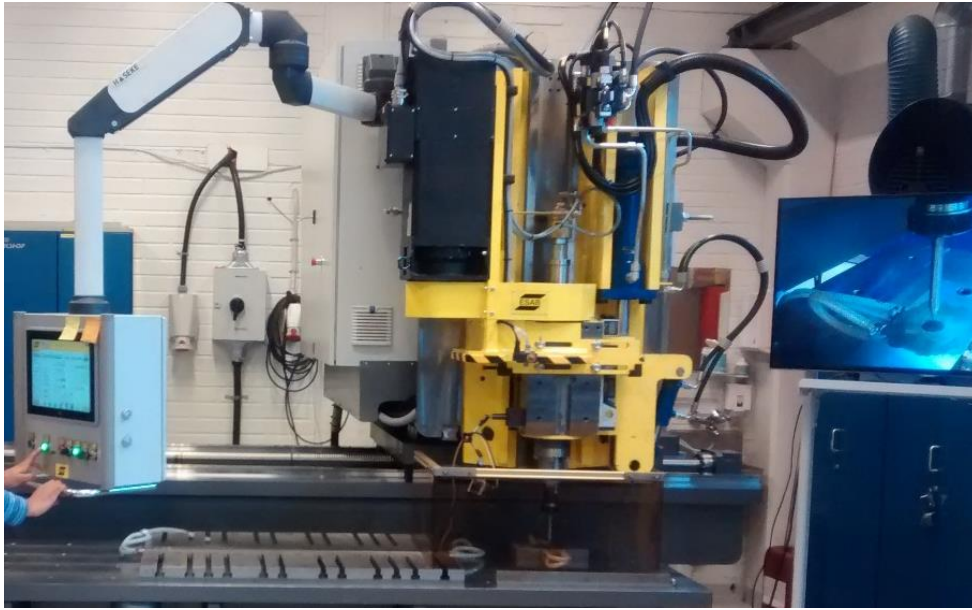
ESAB *LEGIO*™ FSW 5U Friction Stir Welding machine
